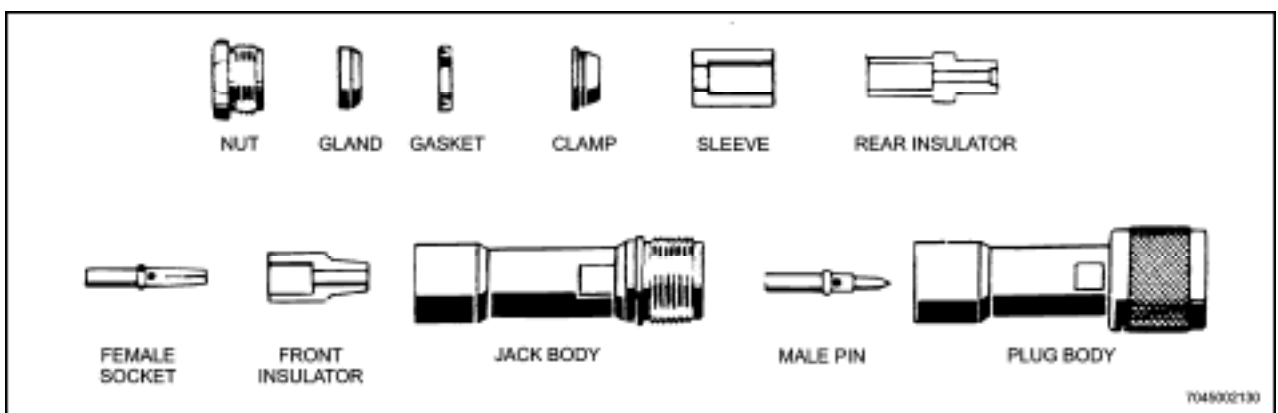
HN Connectors with Captivated Contacts - Exploded View
